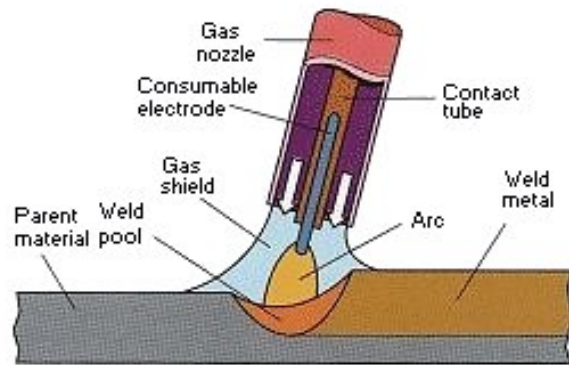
Schematic view of manual gas metal arc welding [48].
